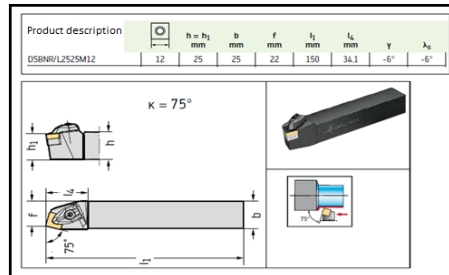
The geometric shape and dimensions of the tool holder used in the machinability experiments
